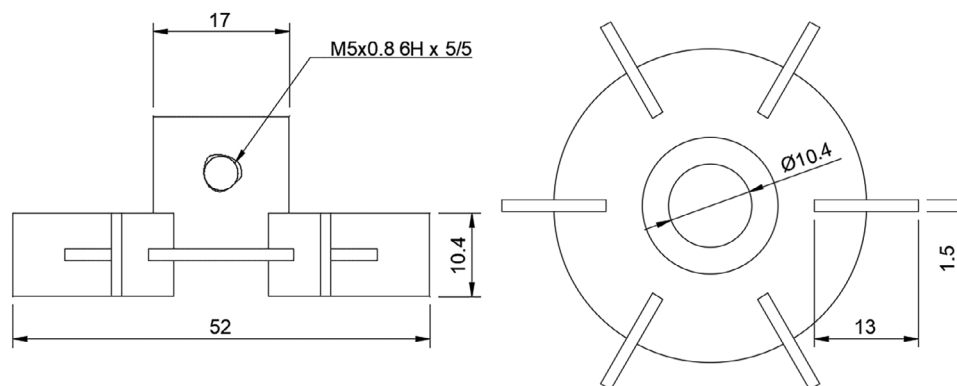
| Technical drawing of modelled Rushton Turbine with $d=52$ mm (all dimensions in mm).
